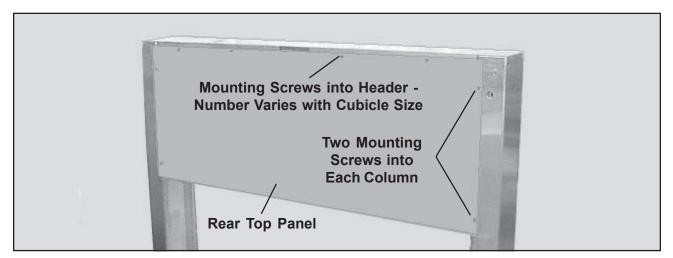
Rear View of Cubicle Showing Mounting of Rear Top Panel
